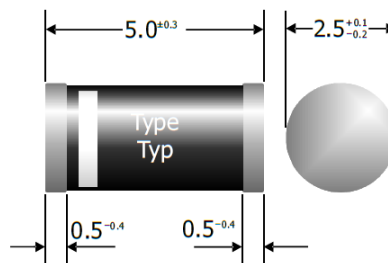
Crosssectional and cutaway view of SM3000 (Melf package)
